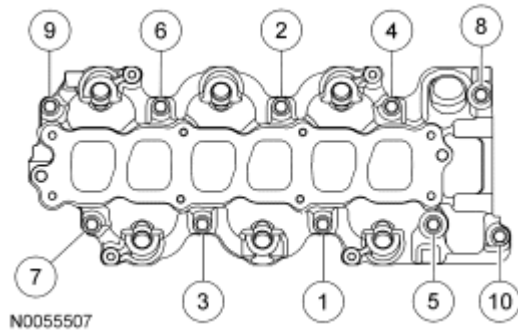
Installing Lower Intake Manifold Bolts In Sequence
